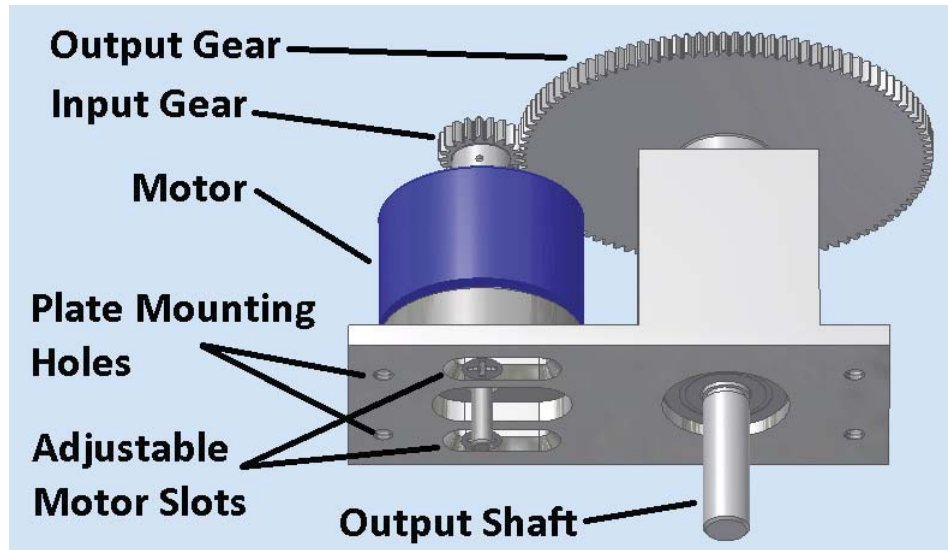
SPU Gearbox. This gearbox was specially designed to be implemented as the SPU propeller power source. The gear box fits most 22 cm motors and screws directly to the upper mounting plate in the SPU. The slots under the motor allow for the use of many different sizes of gears giving the gearbox an adjustable gear ratio. The current configuration has a gear ratio of 5.25.
